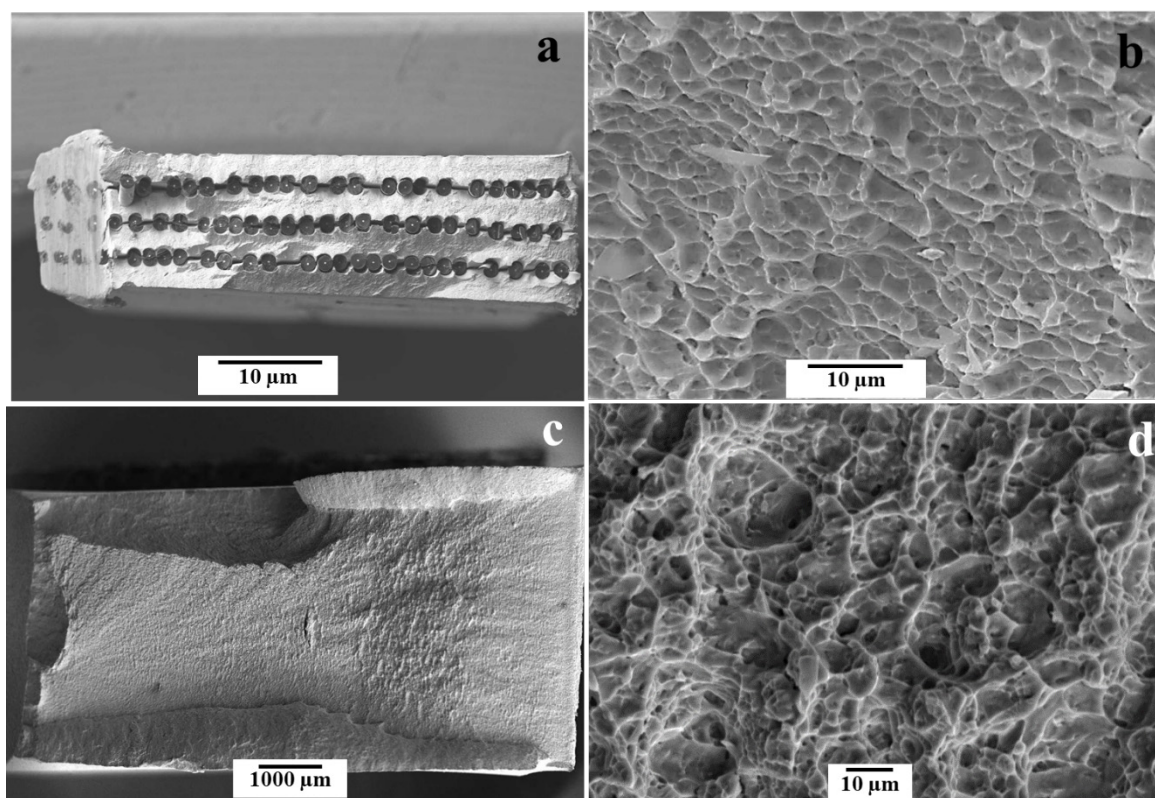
Fracture surface of samples after three-point bending:
